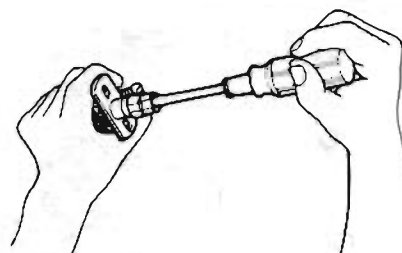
Removing rotor shaft and drive shaft assembly
